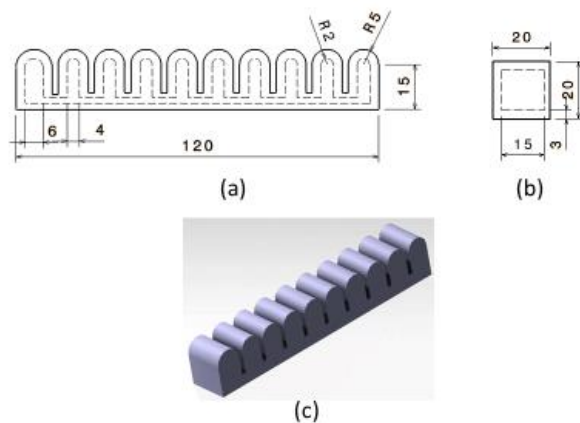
(a) Front view, (b) Side view, and (c) Isometric view of the multi-chamber SPA with circular air chambers
